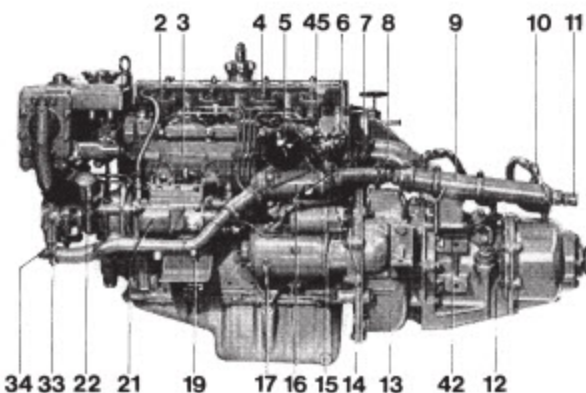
Port side, MD 21 A with Borg-Warner reverse gear
